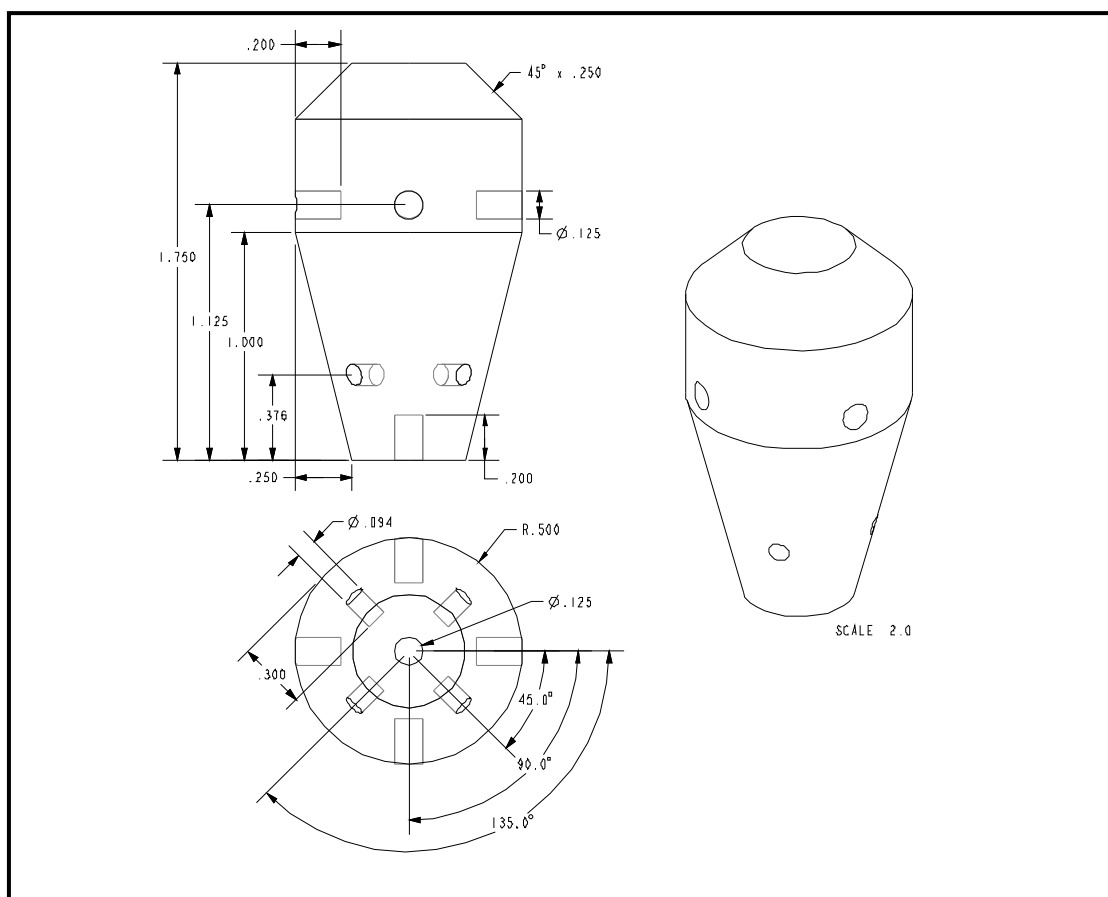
CAD Drawing of the Standard JSR Mold – Cavity Mold (Material: Low Temperature Machinable Wax, Filename: standardmold.drw).
